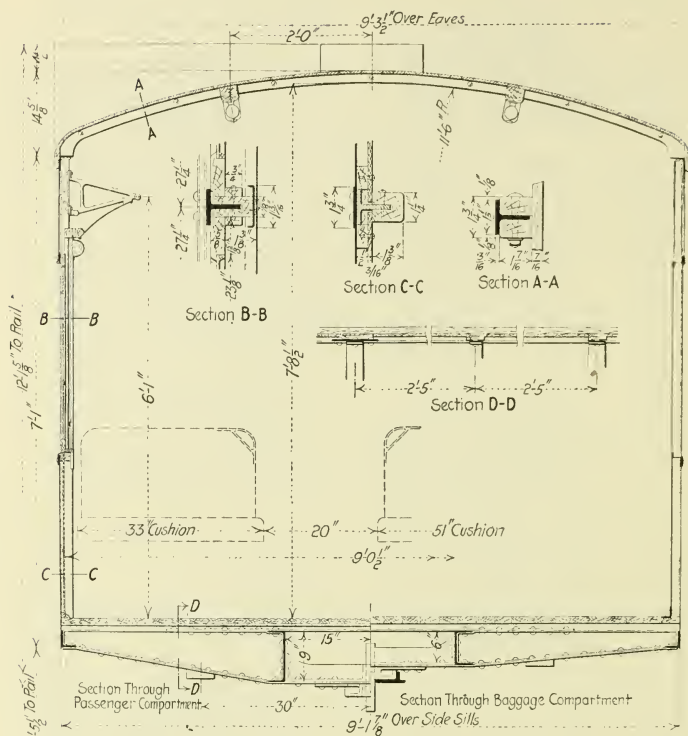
CROSS-SECTION OF THE BODY OF A 55-PASSENGER MOTOR RAILCOACH
